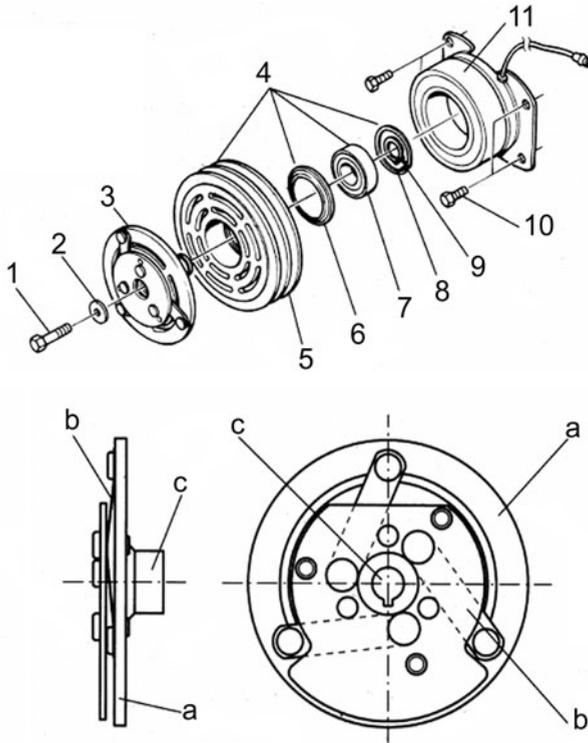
Detail of spool – pulley group: 1 fastening bolt for frontal plate, 2 plate washer, 3 drag group, 4 complete pulley, 5 pulley, 6 dust wall, 7 bearing, 8,9 stop rings, 10 fastening screw for magnetic spool, 11 magnetic spool, a plate, b spring, c hub.
